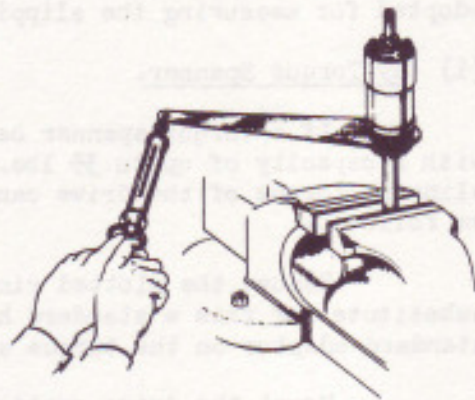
MEASURING SLIPPING TORQUE OF CLUTCH WITH A SPRING SCALE.
